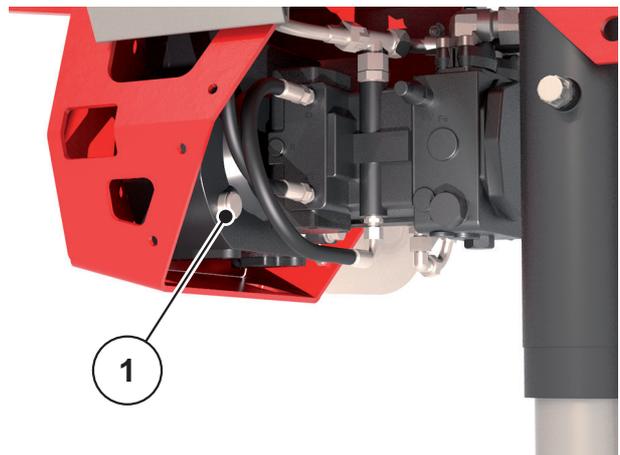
Checking the oil level of the VARIO drive gearbox
